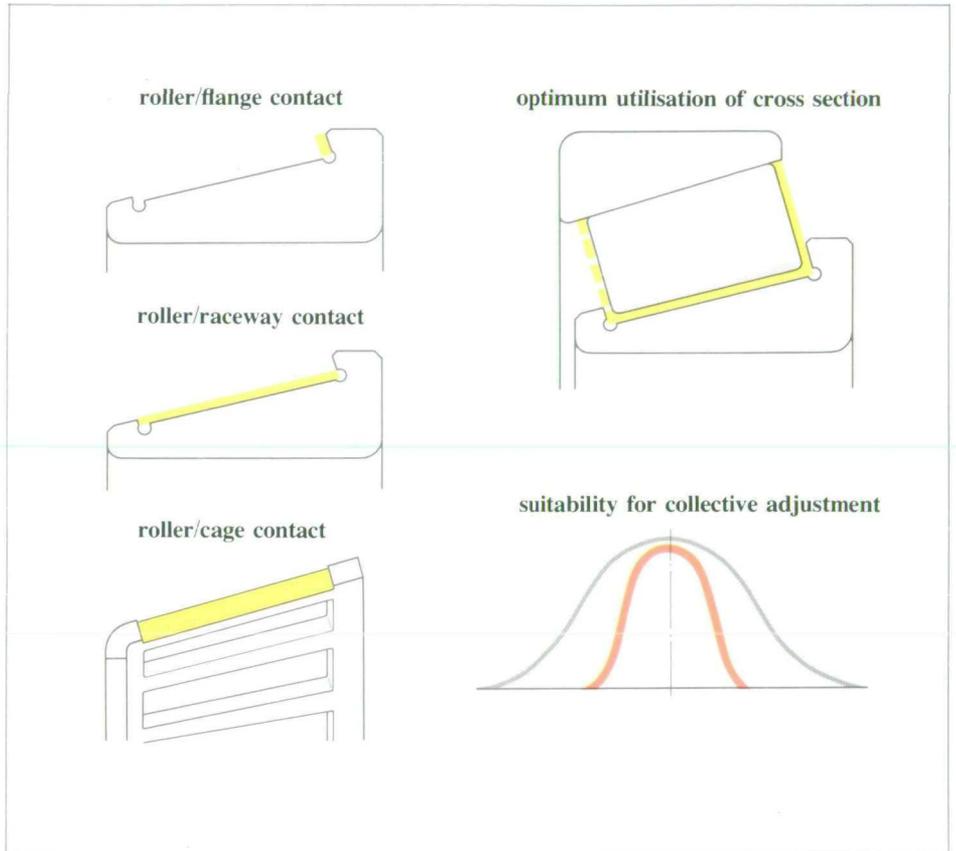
Main aspects of development work in design and manufacture of modern taper roller bearings
